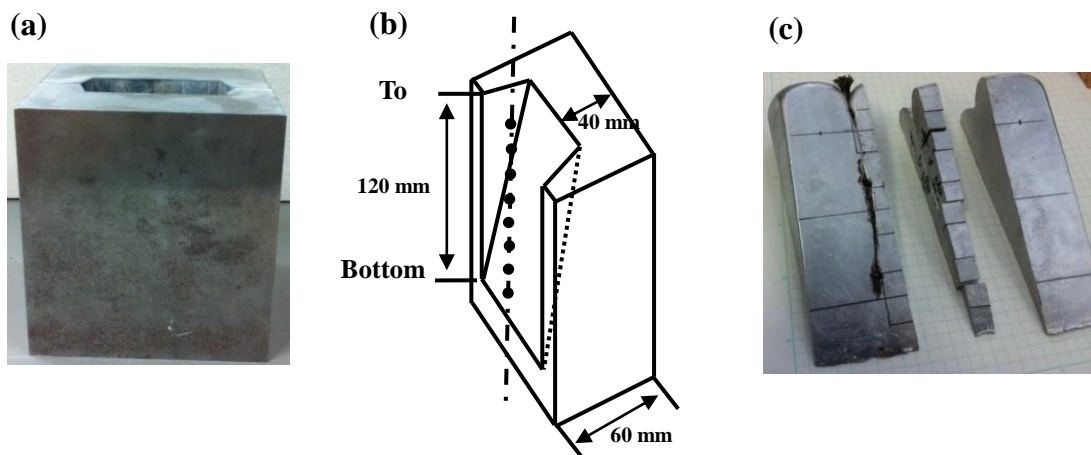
The stainless steel mold for casting (a) and its half schematic drawing (b). The locations of the thermocouples during casting were marked by solid circles. They are 20mm, 30mm, 40mm, 50mm, 60mm, 70mm, 80mm and 90mm from the bottom of the mold. The wedge-shaped specimen obtained by this mold (c).
